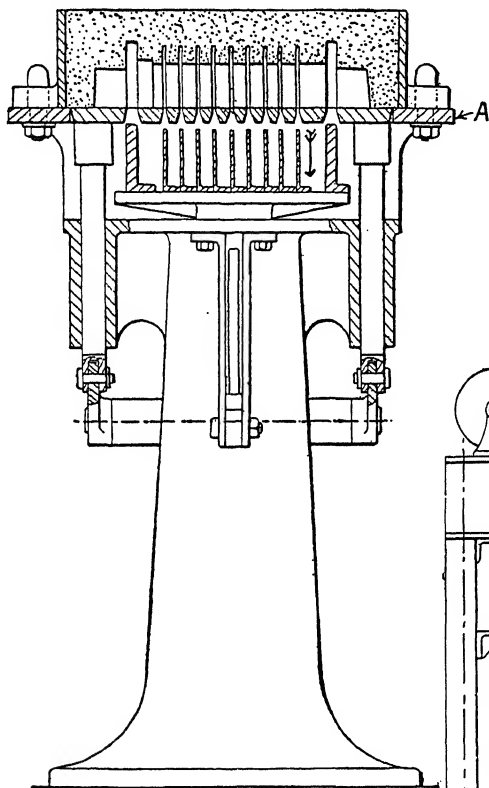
Radiators and Flanges of Motor Cylinder drawn through Stripping Plate in a Fixed Table A
